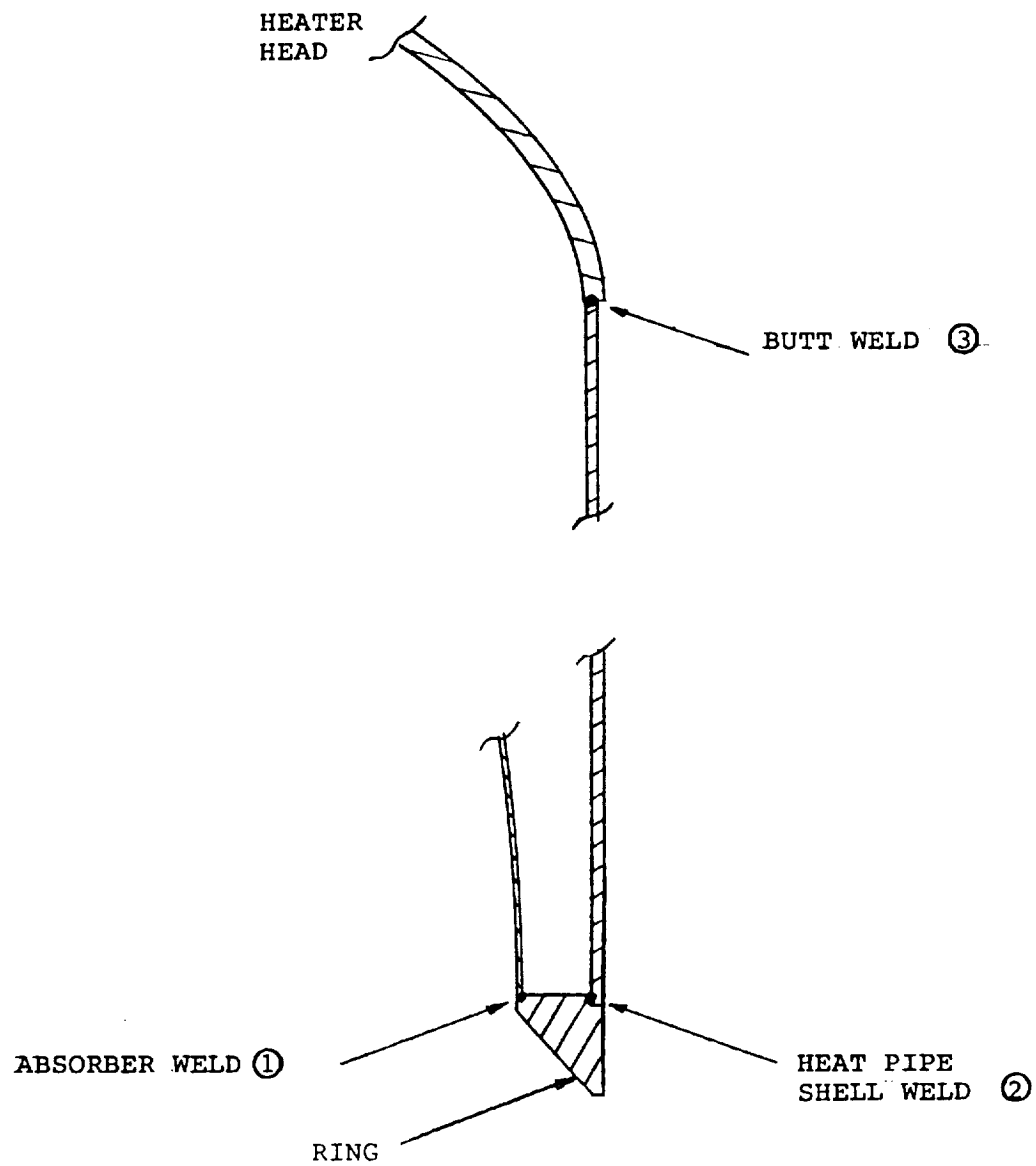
Cavity Heat Pipe Weld Designs.
